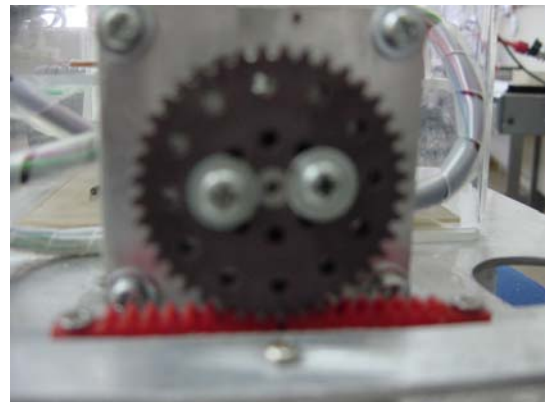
Front wheel cornering motion is used Rack and Pinion Joint.
